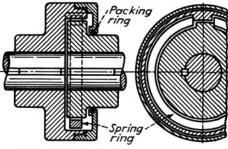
This T. L. Smith Company type of coupling has a flexible metal ring engaging projections integral with the outer and inner hubs. A packing ring protects the interior from dirt, yet compensates for angular misalignment. The coupling can drive in either direction.
